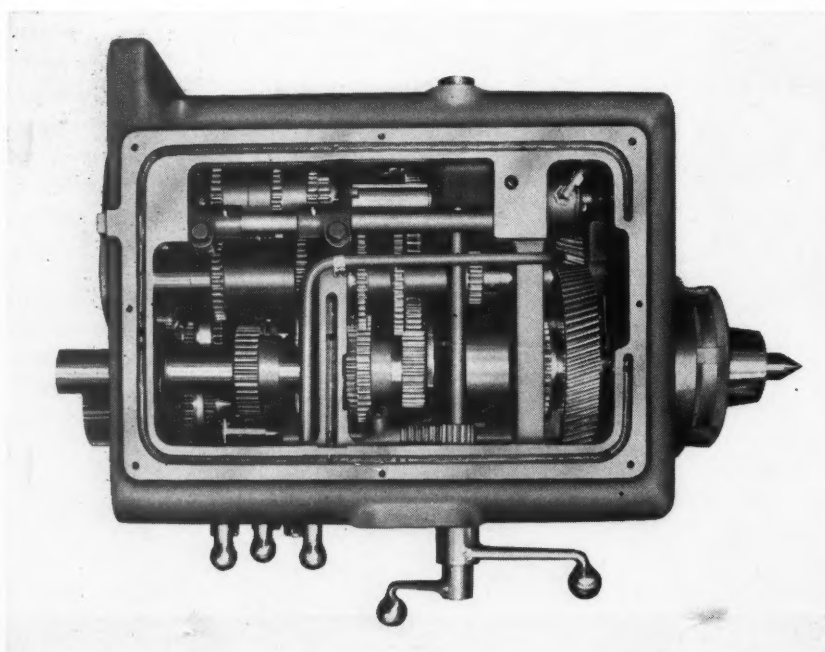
Headstock incorporating free-running principle used on new line of LeBlond engine lathes
